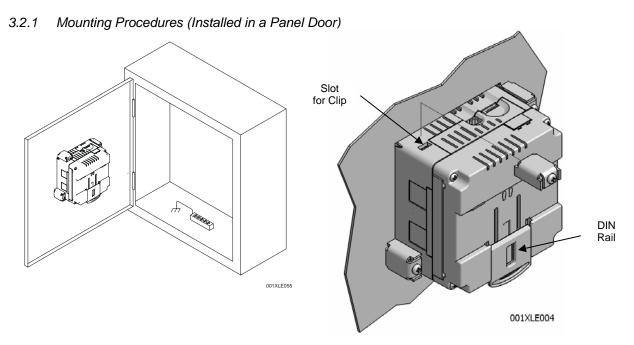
Panel Mounting of the XLe and Close-up View of Back
